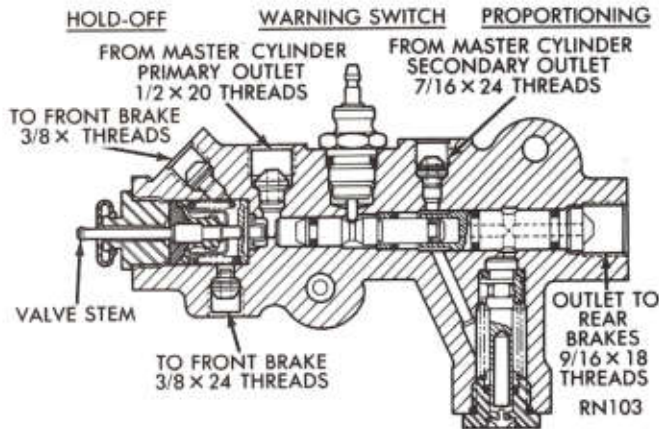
Combination Warning Switch/Hold-Off/Proportioning Valve Assembly
